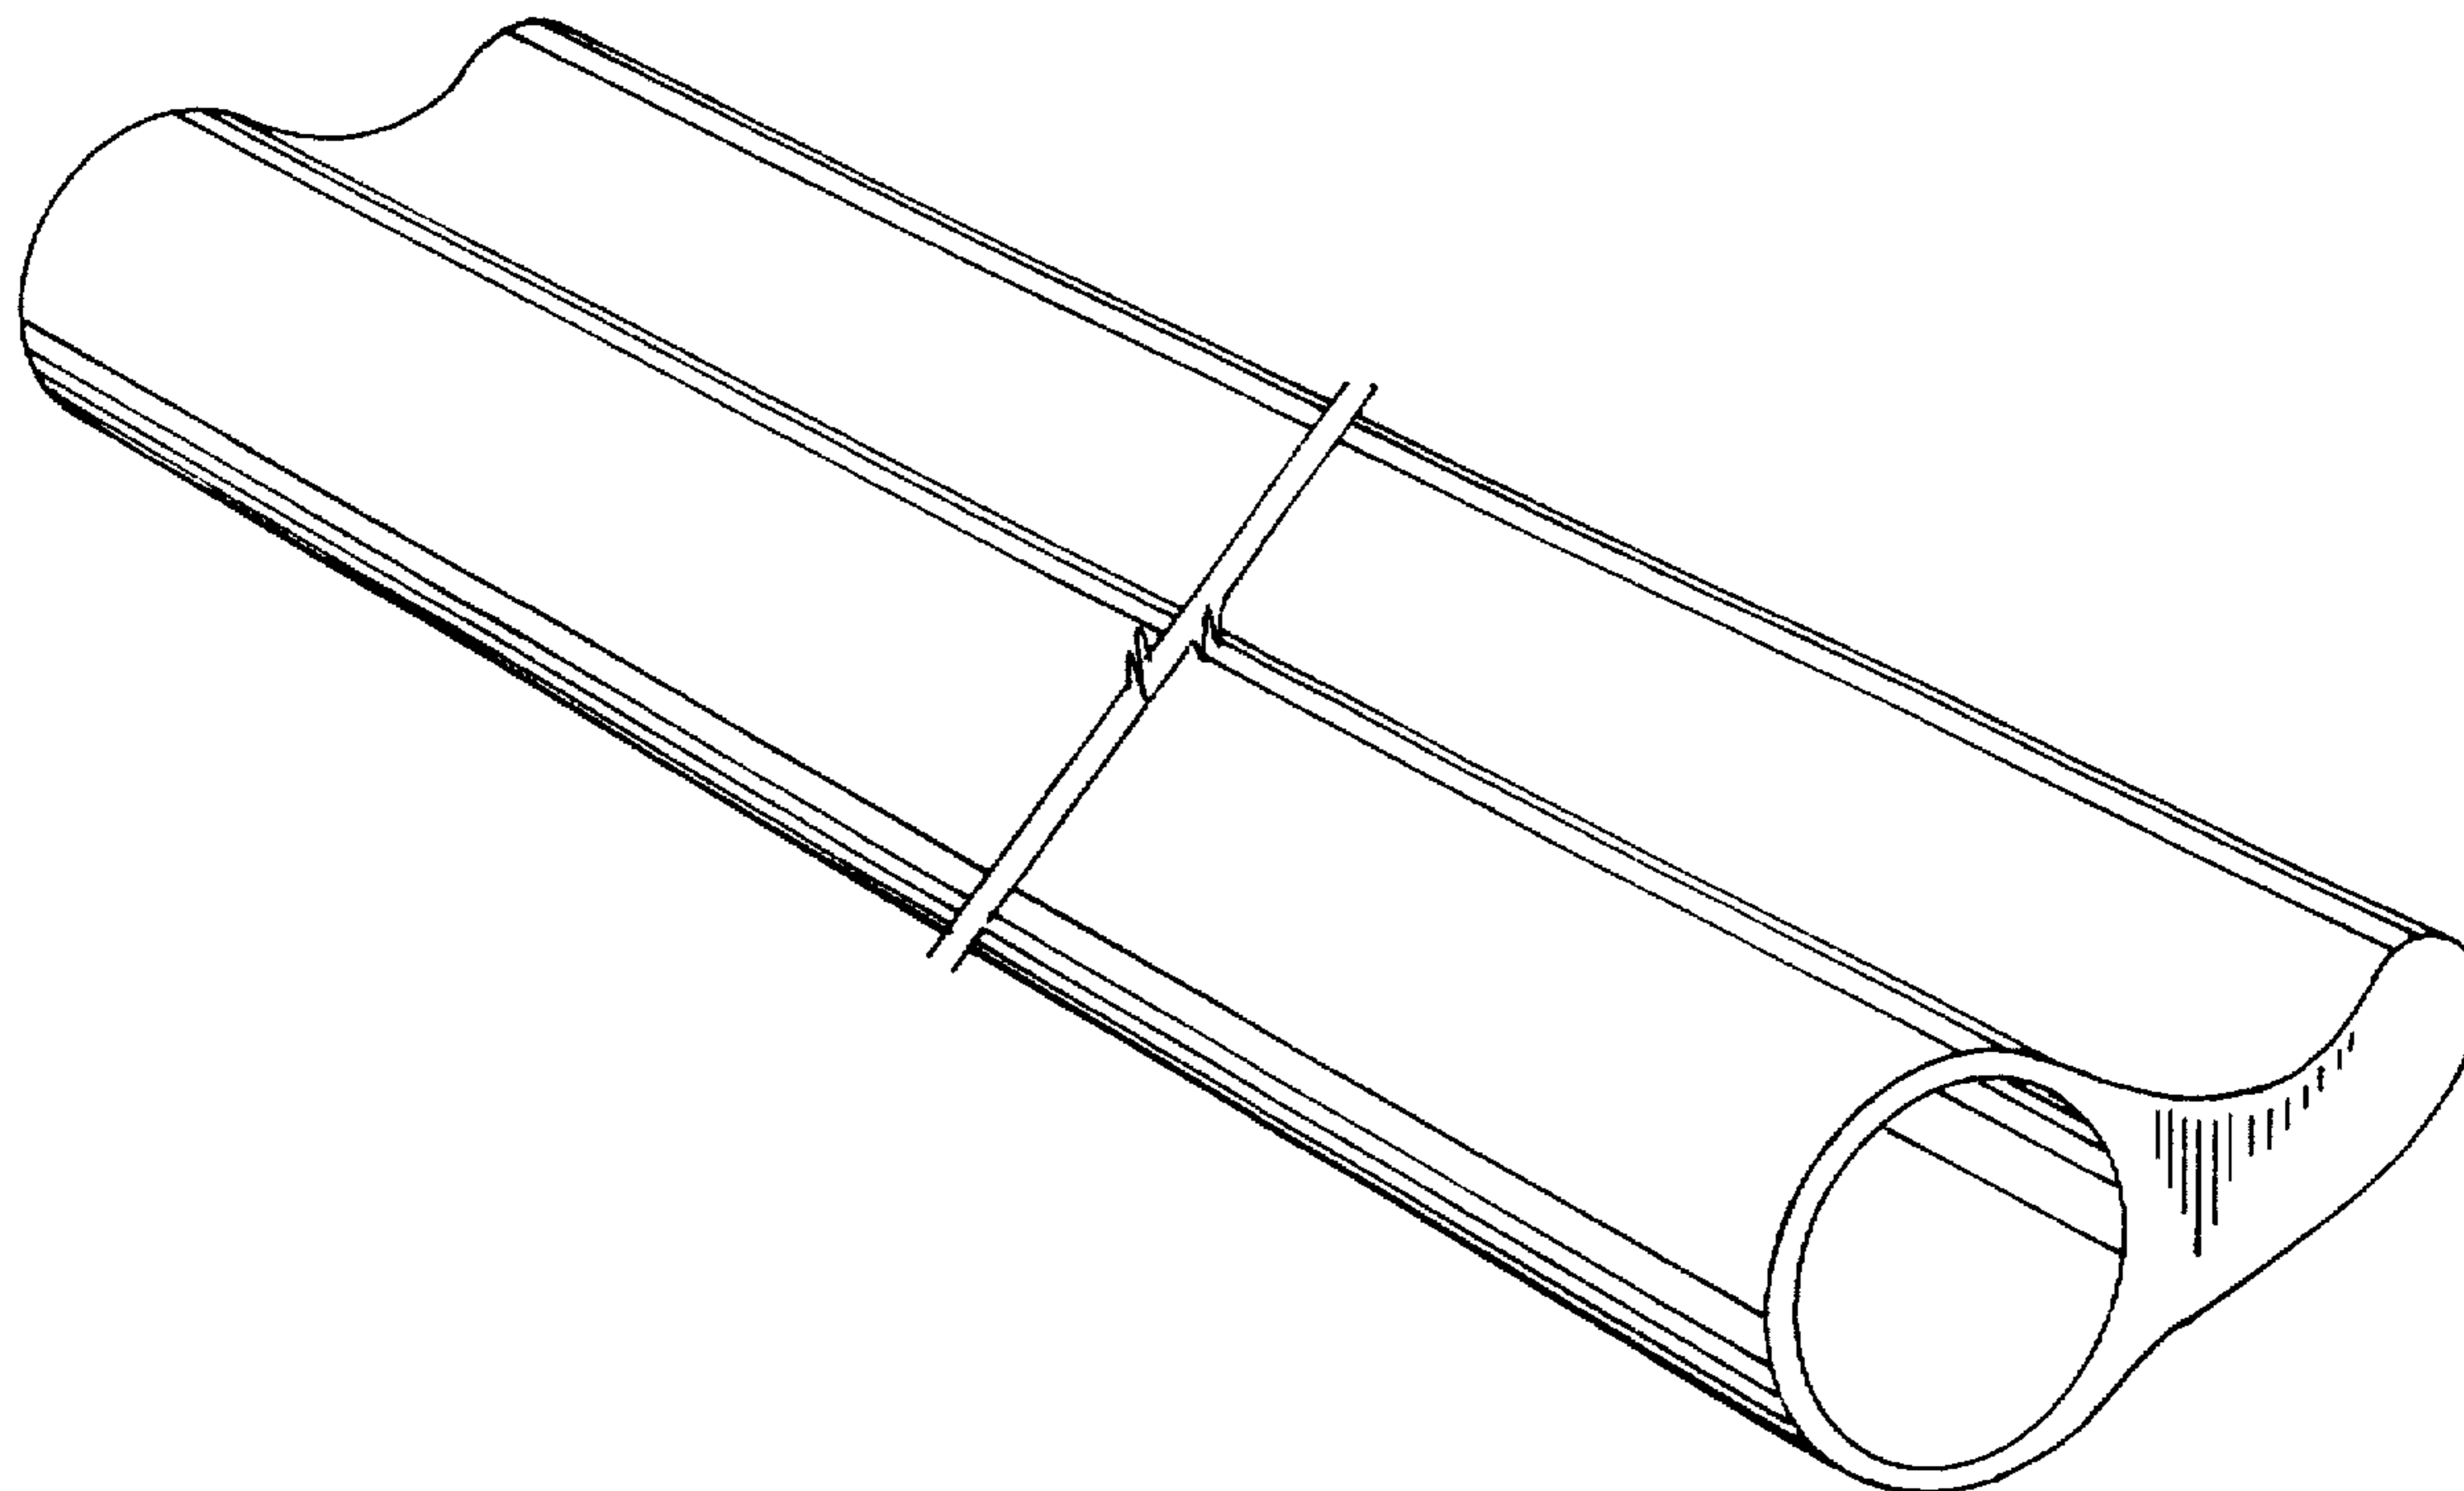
is a perspective view of a cam latch extrusion for a trailer door illustrating my new design;
